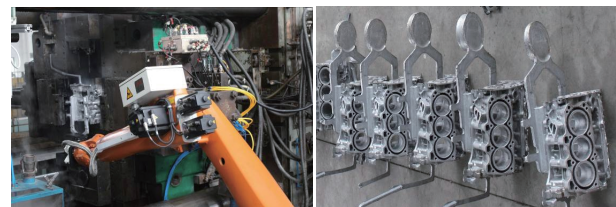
Photographs of die cast aluminum alloy V6 engine blocks.
